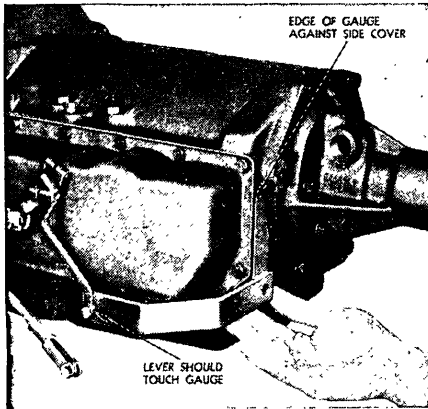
Checking position of throttle control lever on 1948-52 Hydra-Matic
